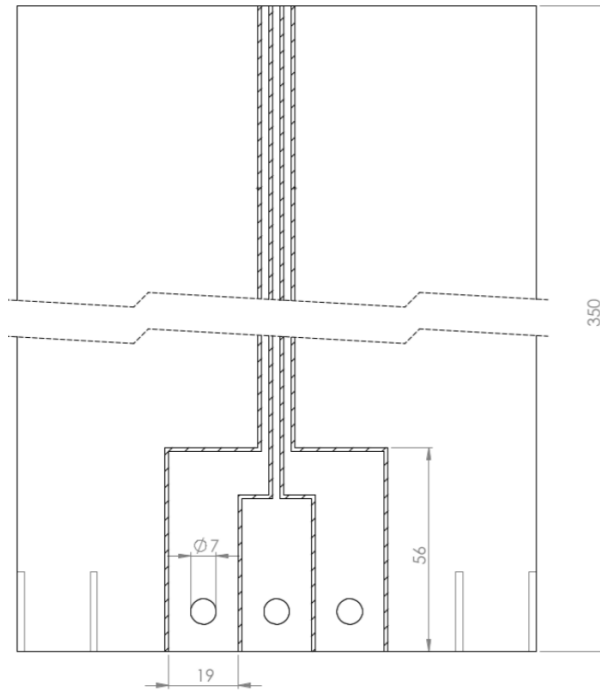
Burner technical drawing - cut side view (dimensions in mm).
